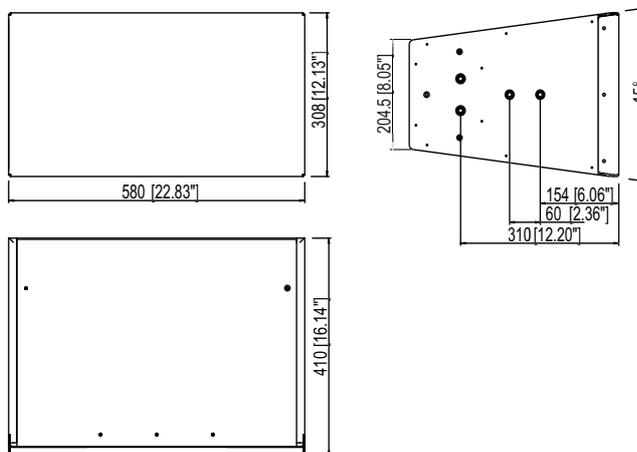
Qi1 cabinet dimensions in mm [inch]
